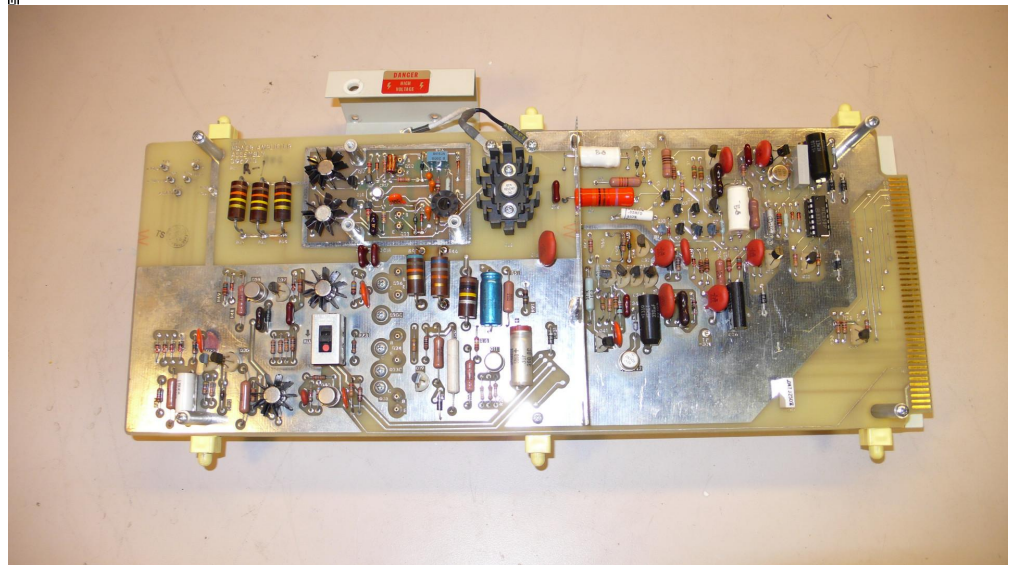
A7 Power Amplifier PCB Assembly (cont)
